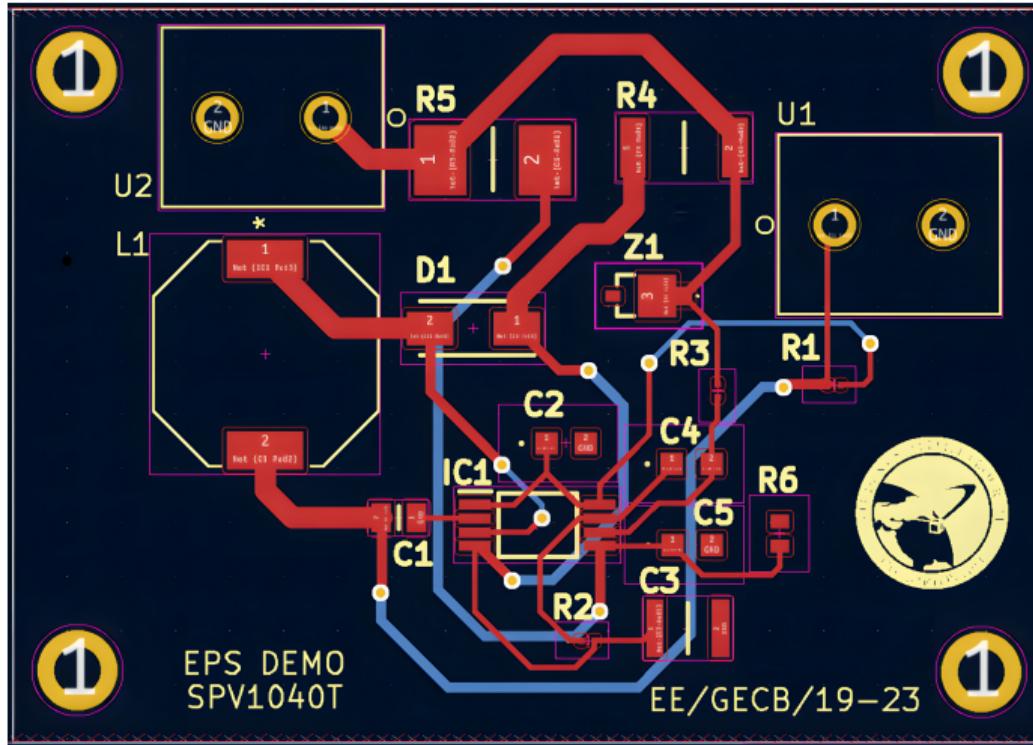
PCB Layout of MPPT (48mm x 34mm)
